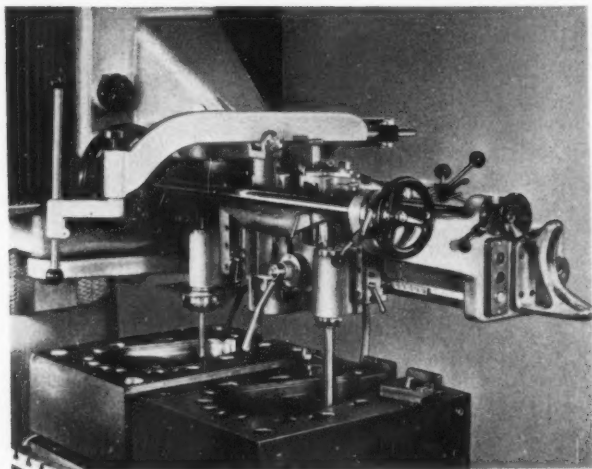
A Close-up View of the Stylus and Cutter Heads
